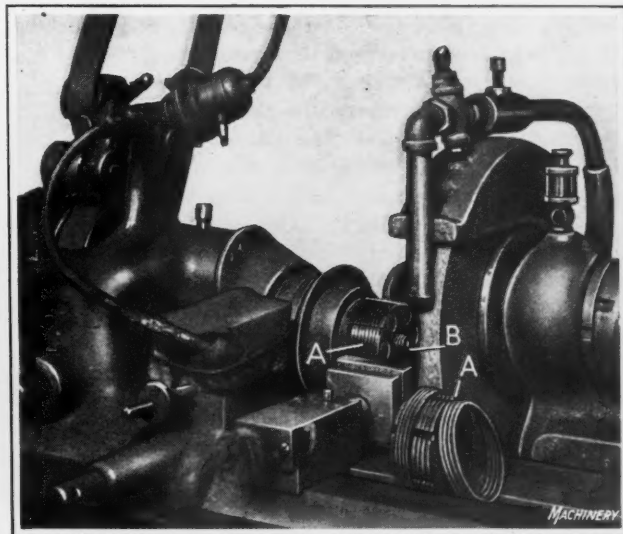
Special Magnetic Chuck Adapter used for holding the Inner Piston-rings while grinding the Outside Diameter
